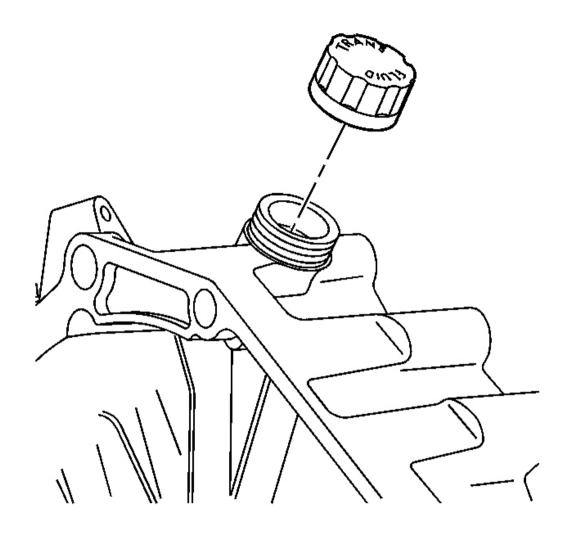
Transmission Filler Cap Courtesy of GENERAL MOTORS CORP.
